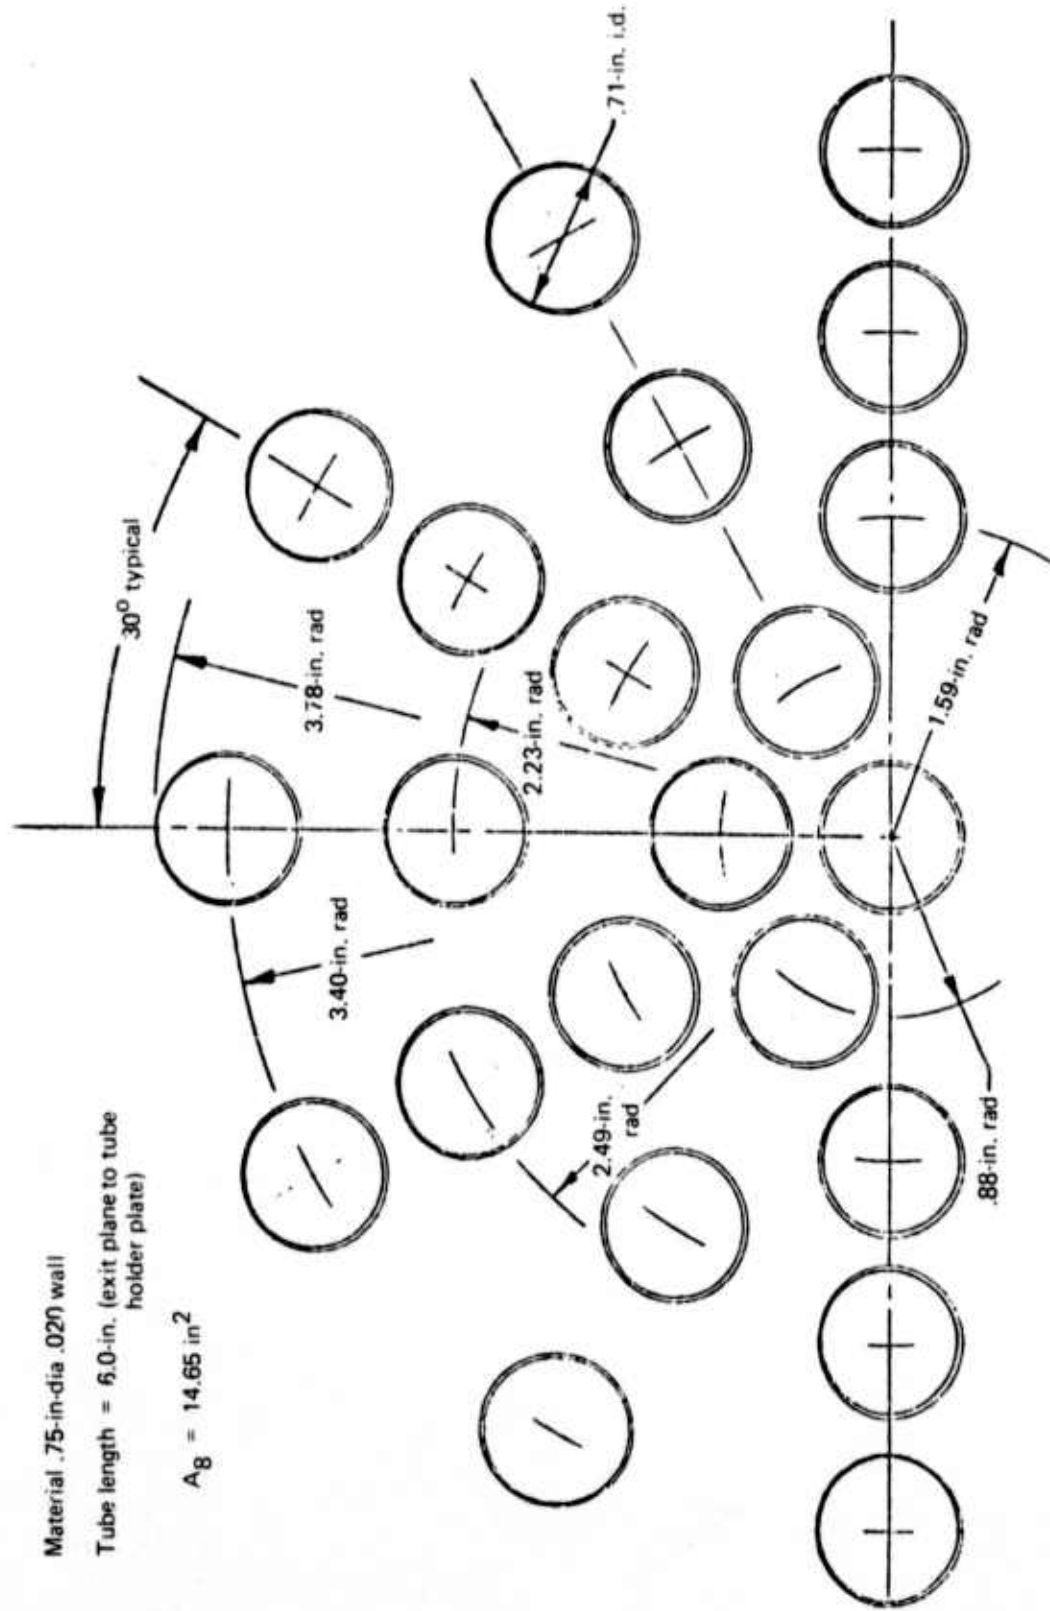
Schematic of 37-Tube, AR 3.3 Straight-Tube Radial-Array Nozzle
